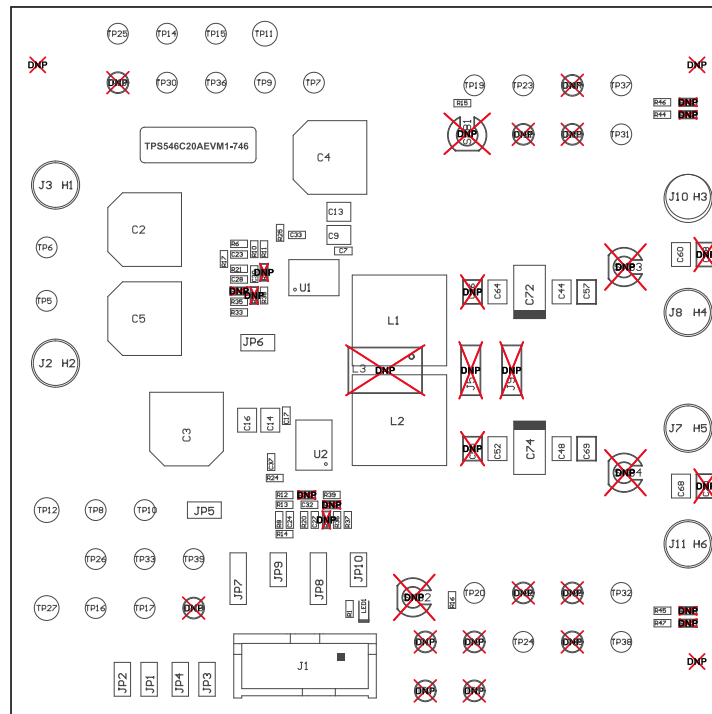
TPS546C20AEM1-746 EVM Top Layer Assembly Drawing (Top View)
